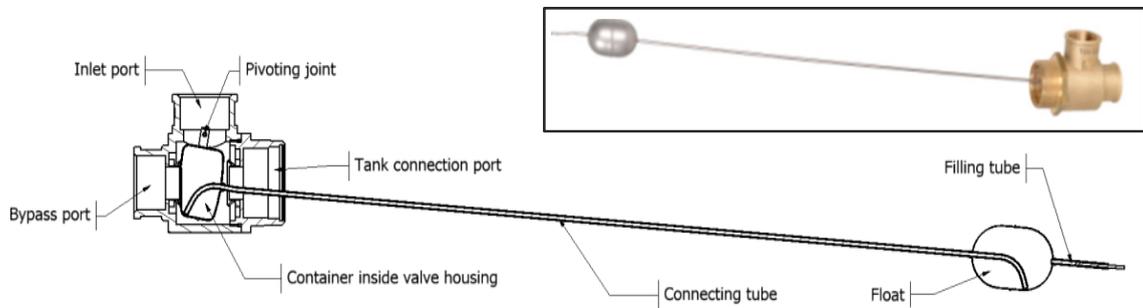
Cross-section drawing of the Thermo-Differential Valve, and an inset picture of the Thermo-Differential Valve
